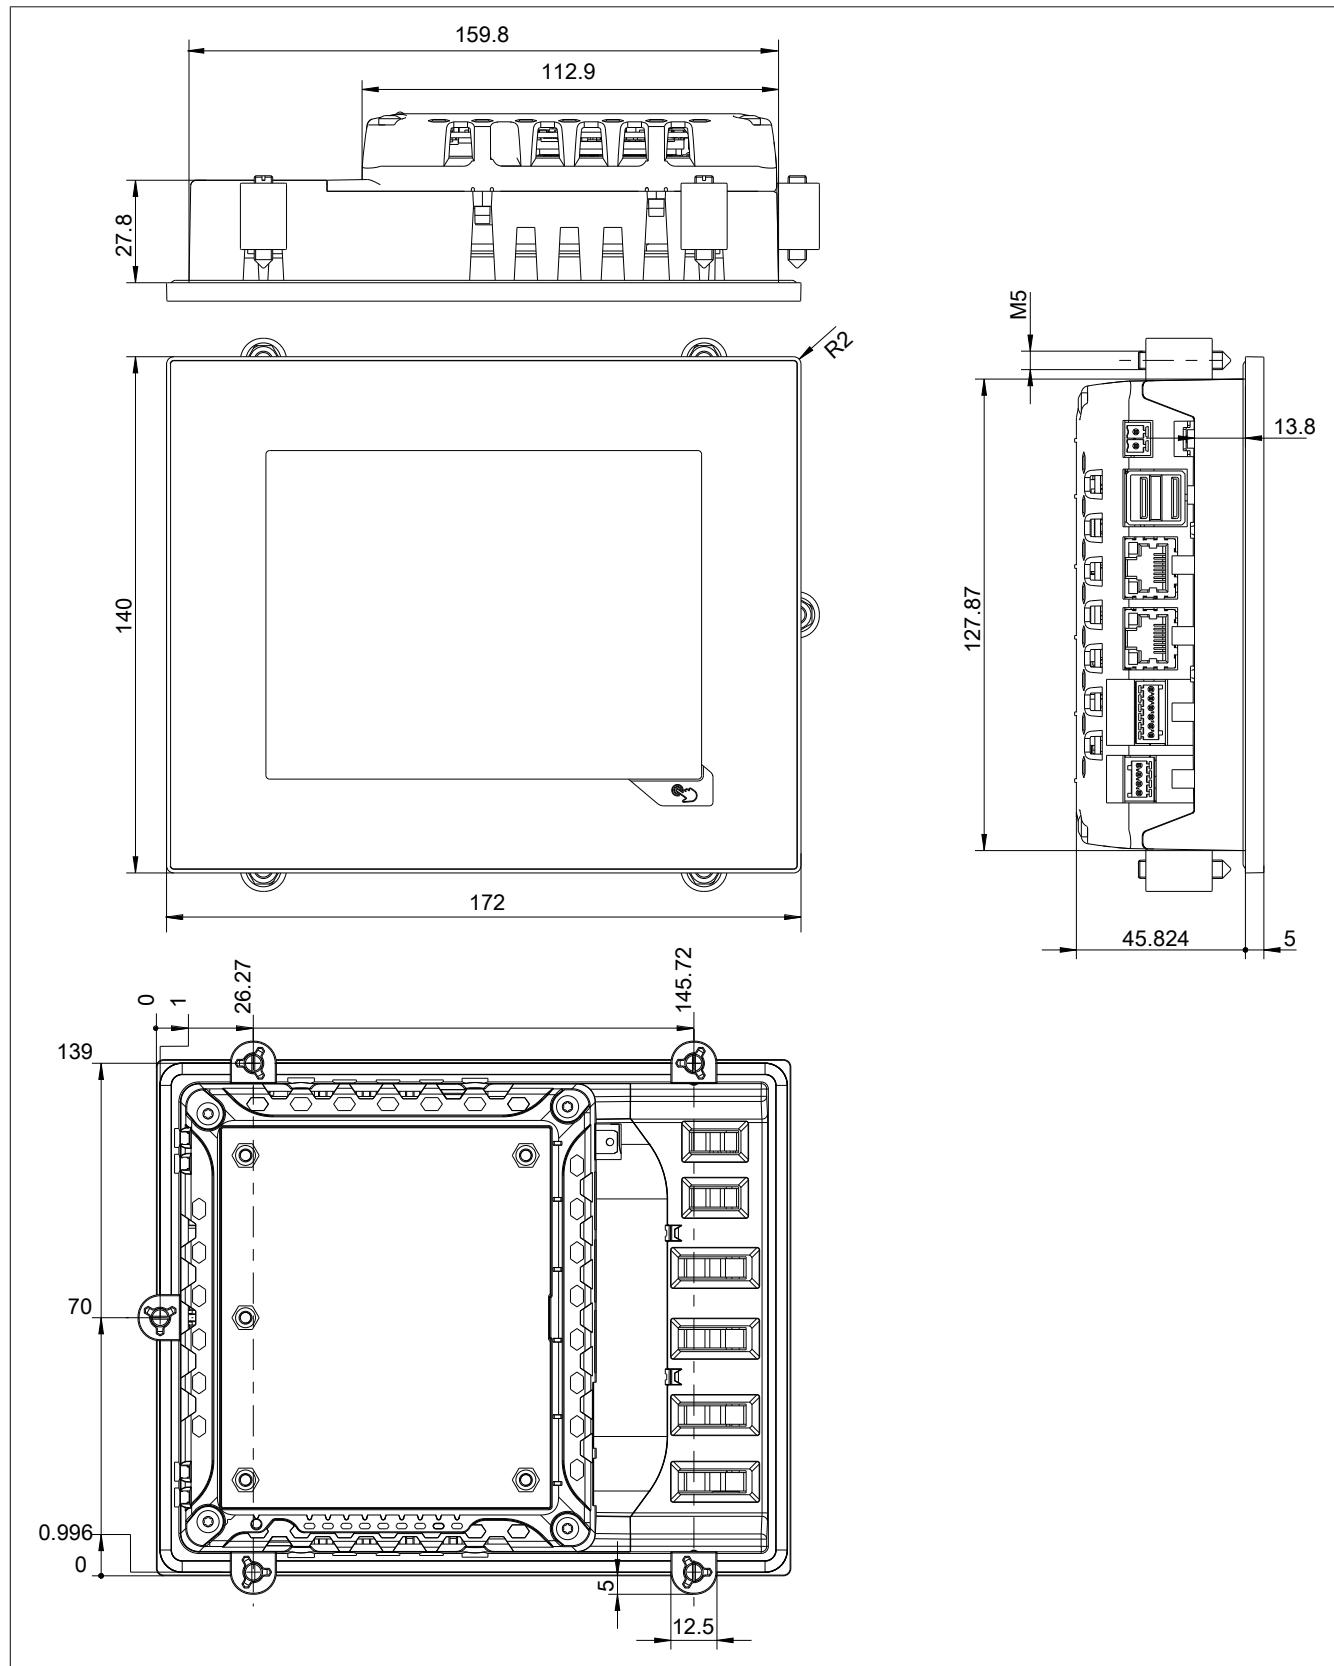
Dimensions - 4PPC70.057x-2xx - 4PPC70.057
